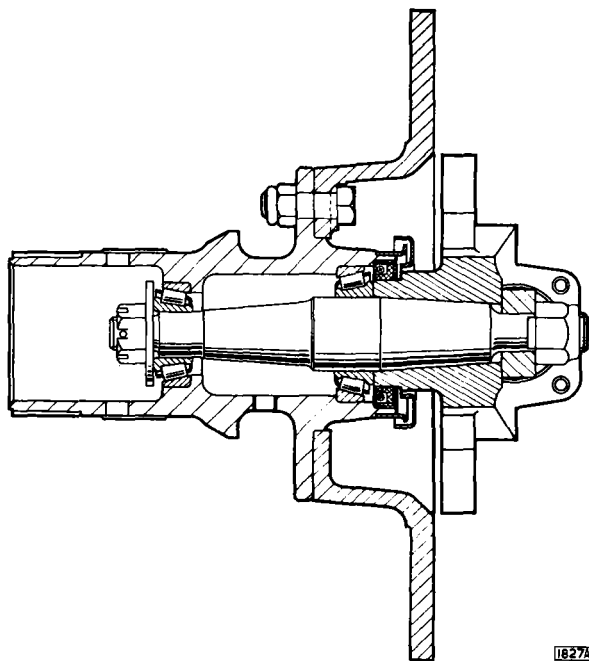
Sectioned plan view of the disc brake hub arrangement.
